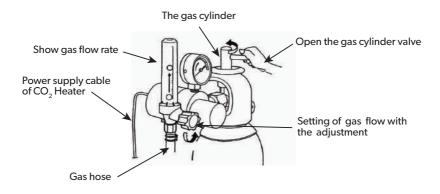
Open the gas valve and Setting of gas flow (for CO<sub>2</sub> MAG welding)
